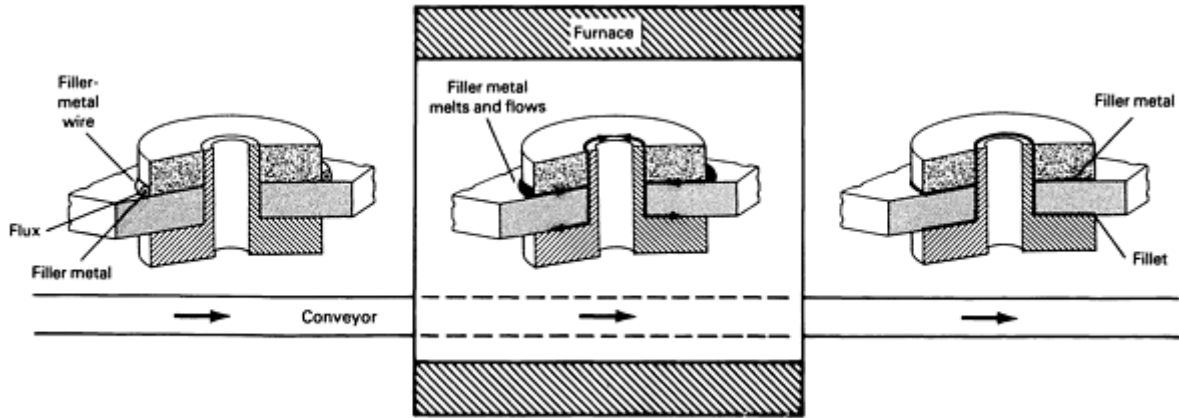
CROSS-SECTIONAL VIEW OF THREE-PART ASSEMBLY AS IT PROCEEDS THROUGH FURNACE BRAZING OPERATION. FILLER-METAL WIRE (FILLER METAL ENCIRCLED BY FLUX) GRADUALLY MELTS AND FLOWS INTO VOIDS BETWEEN THE THREE SECTIONS AND THEN COOLS TO FORM A SINGLE-UNIT WORKPIECE AS IT IS CONVEYED THROUGH THE FURNACE.
